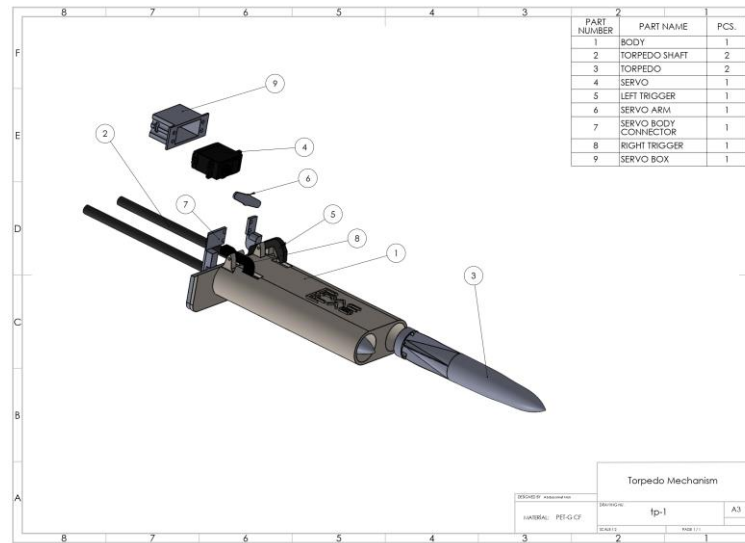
Technical exploded view of the dual torpedo mechanism.
